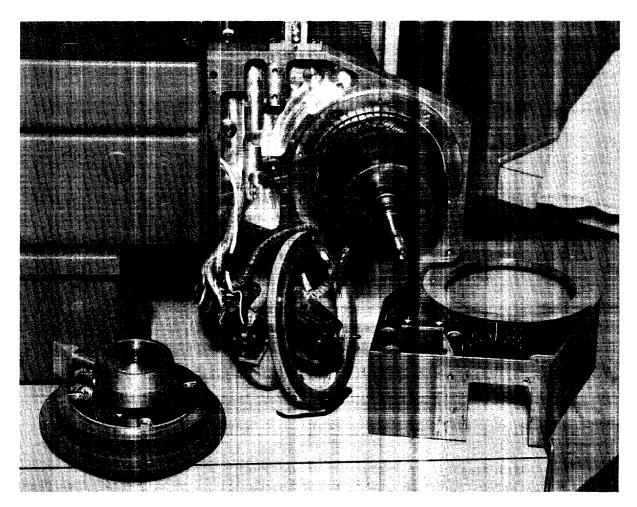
Disassembled Motor. White Silicone Rubber Placed on Brush Springs to Eliminate Noise
